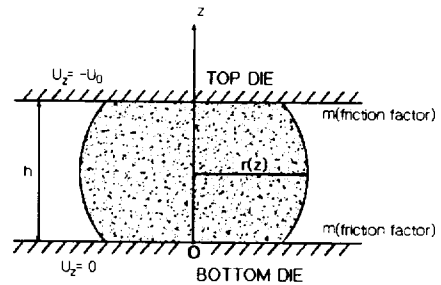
Upset forging of a cylindrical billet with dissimilar frictional conditions at the top and bottom die-material interfaces.
